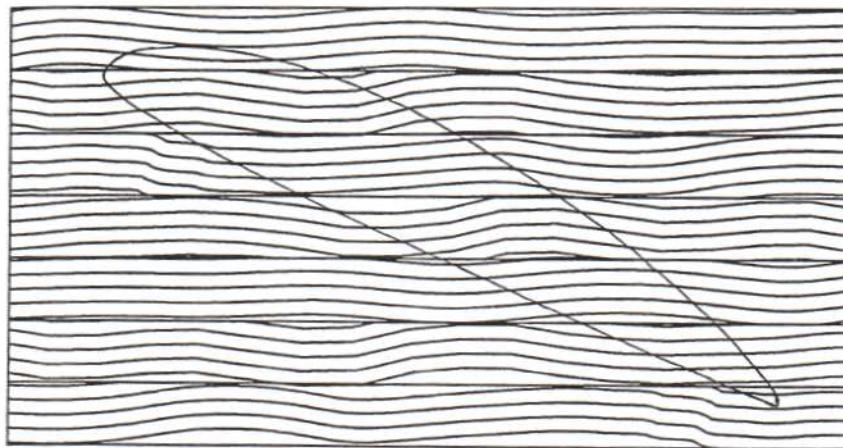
SECTION VIEW OF THE PROPELLER BLOCK
